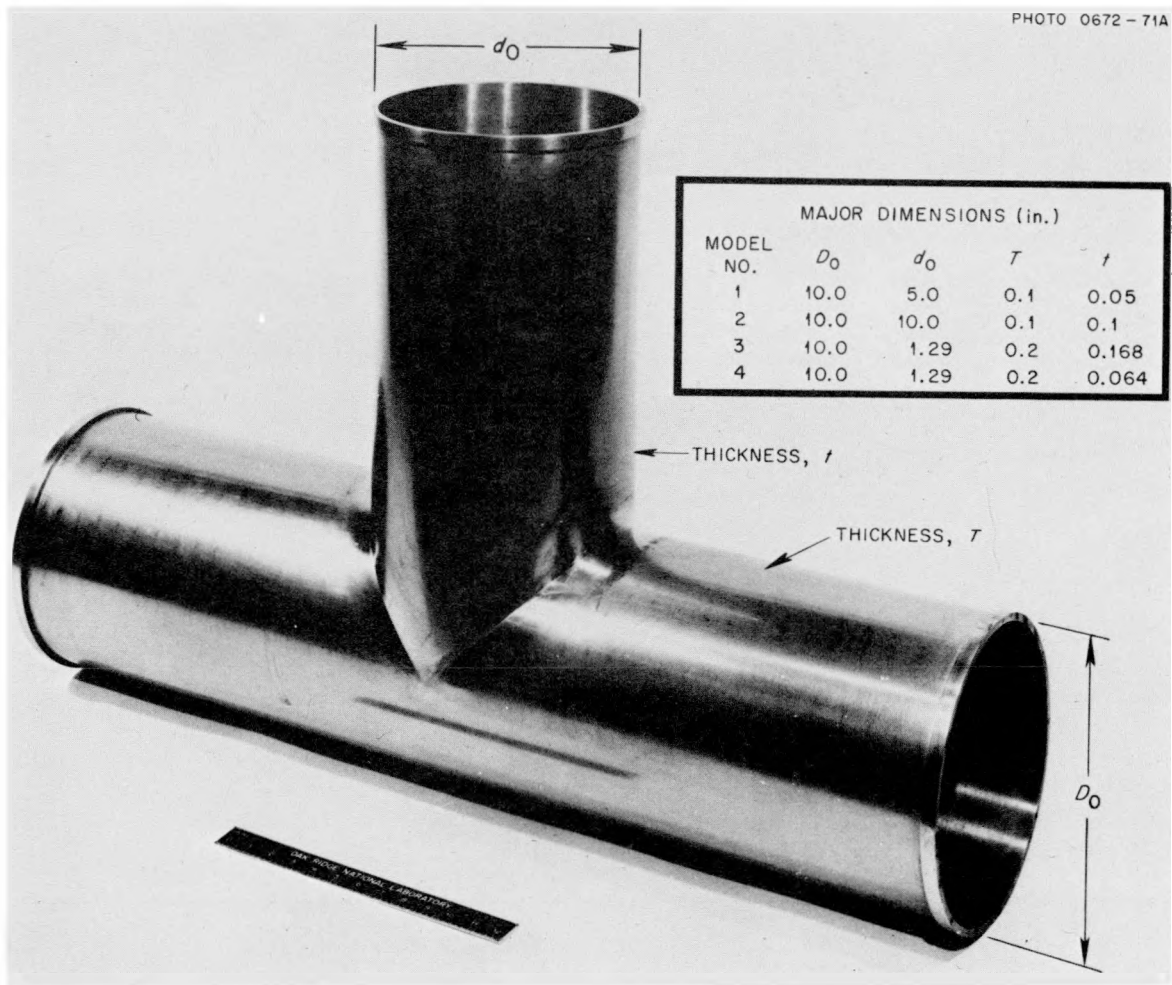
Thin-shell cylinder-to-cylinder Model 2 and table showing dimensions of all four models in the test series. (For conversion to SI units, 1 in. = 2.54 cm).
